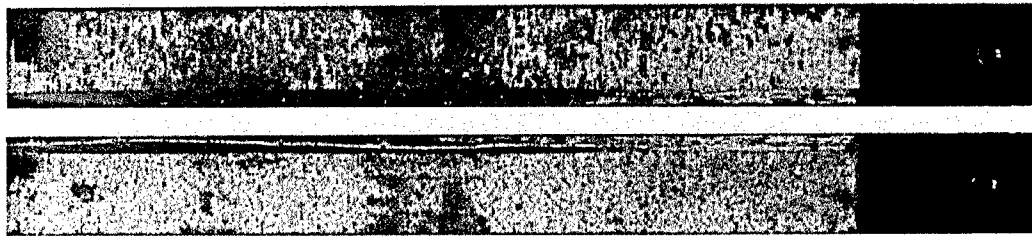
Fracture surfaces of the Ti/FM[®]x5/Ti bonded system
